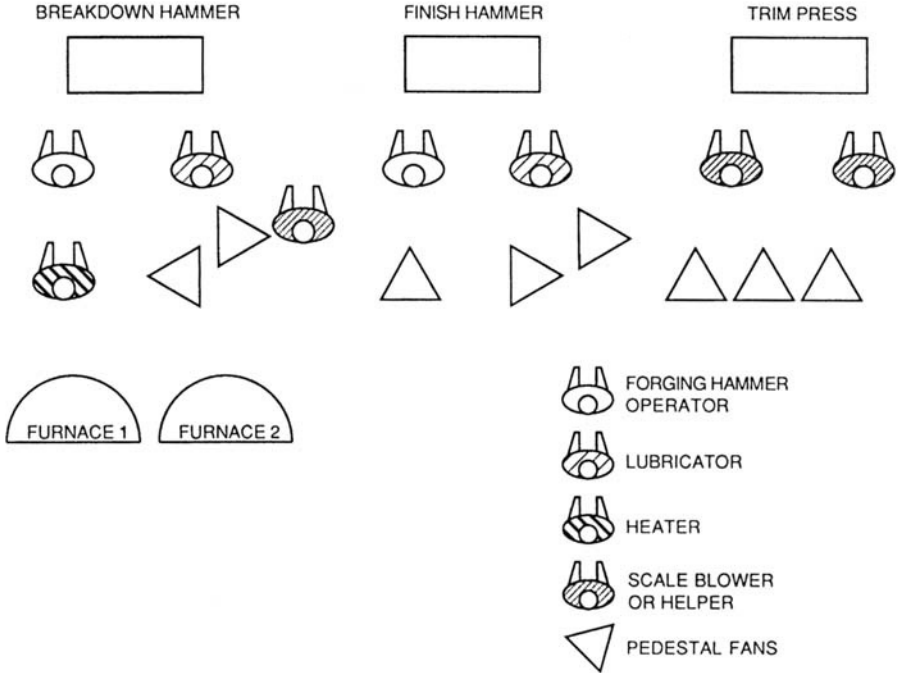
Layout of equipment and hammer operating crew. The number of personnel will vary with the size and complexity of the workpiece. Complex parts will require two hammers each with an operator and lubricator, two furnaces each with a heater, a few helpers to move the parts, and one trim press operator for a total of 9–10 persons.
